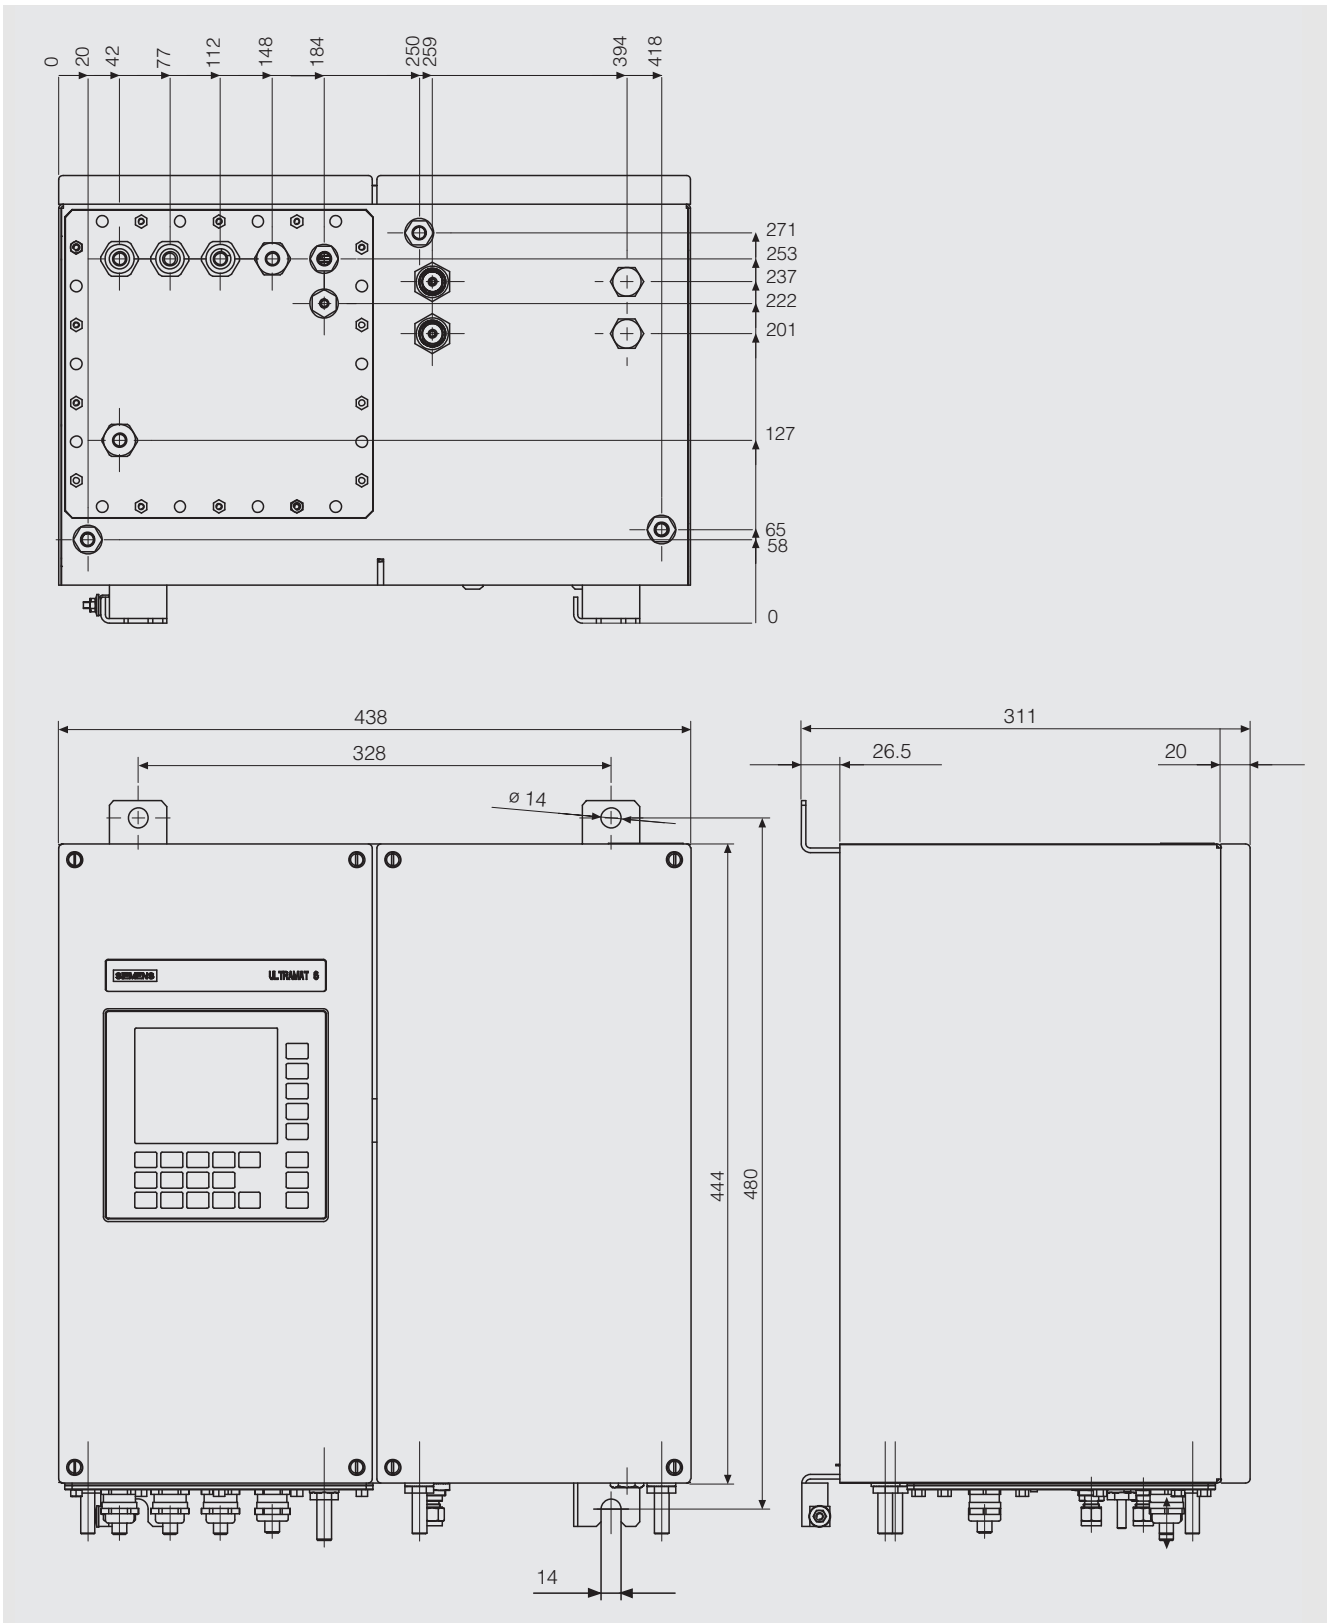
ULTRAMAT 6, field unit, dimensions in mm
